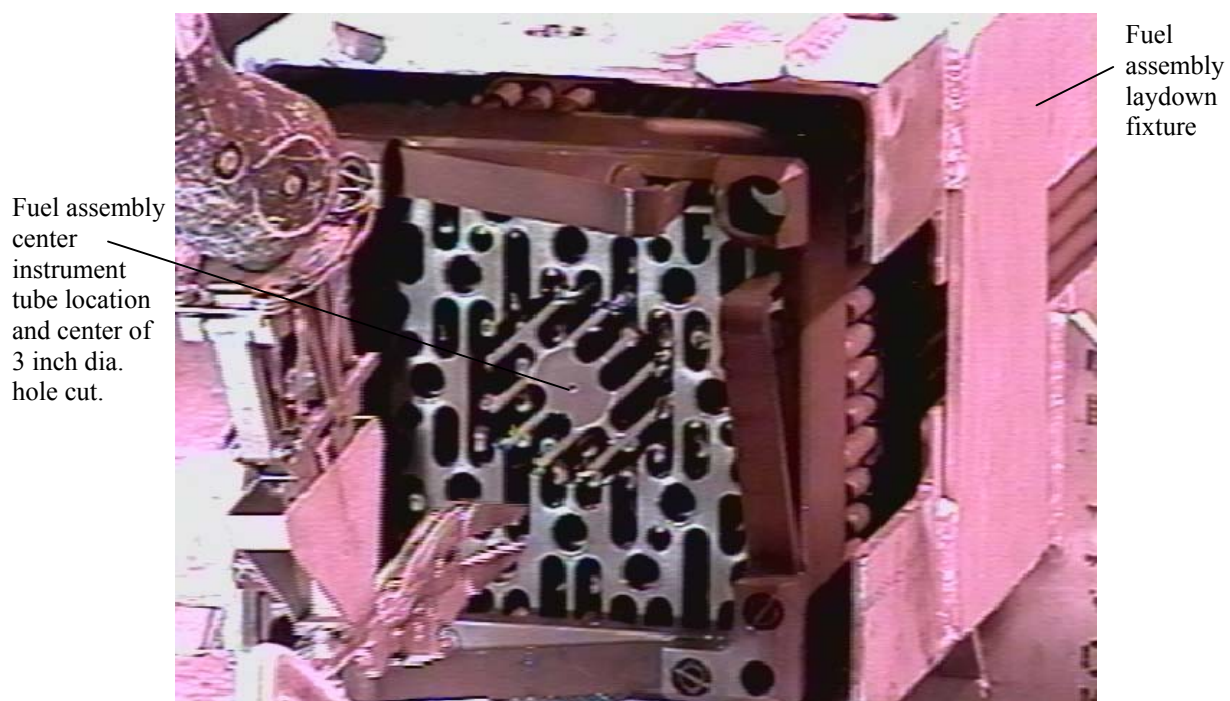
Fuel assembly T-11—after cutting a 3-inch dia. hole in top nozzle to access rods.
